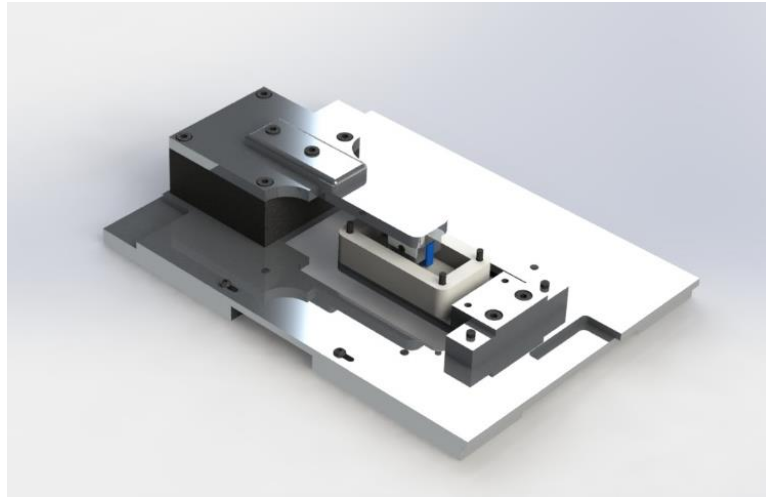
Rendered CAD design model of shearing system of mechanical cell loading device (assembled view)
